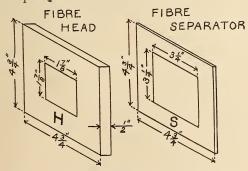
CONSTRUCTION OF FIBRE HEADS
